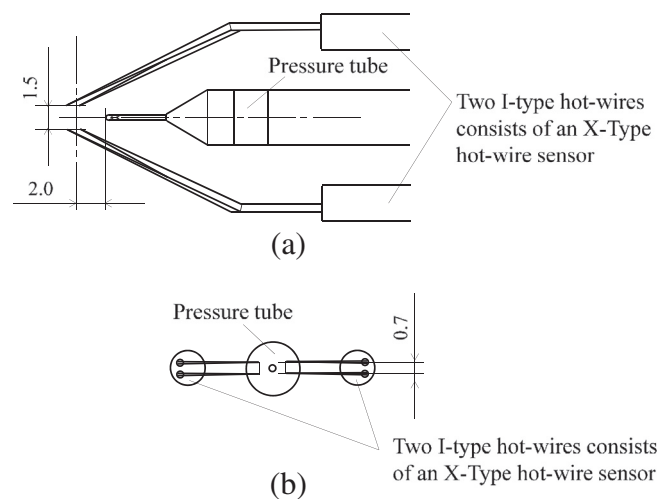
Schematic view of the combined probe (Unit: mm). (a) Top view. (b) Front view.
